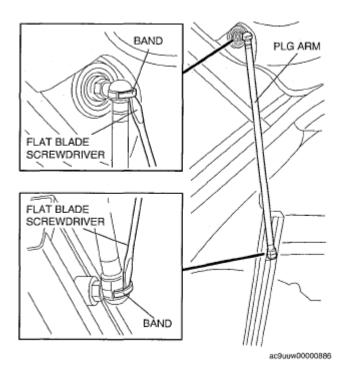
Prying PLG Arm Band With Screwdriver Courtesy of MAZDA MOTORS CORP.
